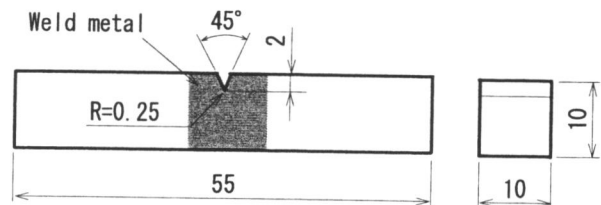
Charpy impact specimen for weld metal.
